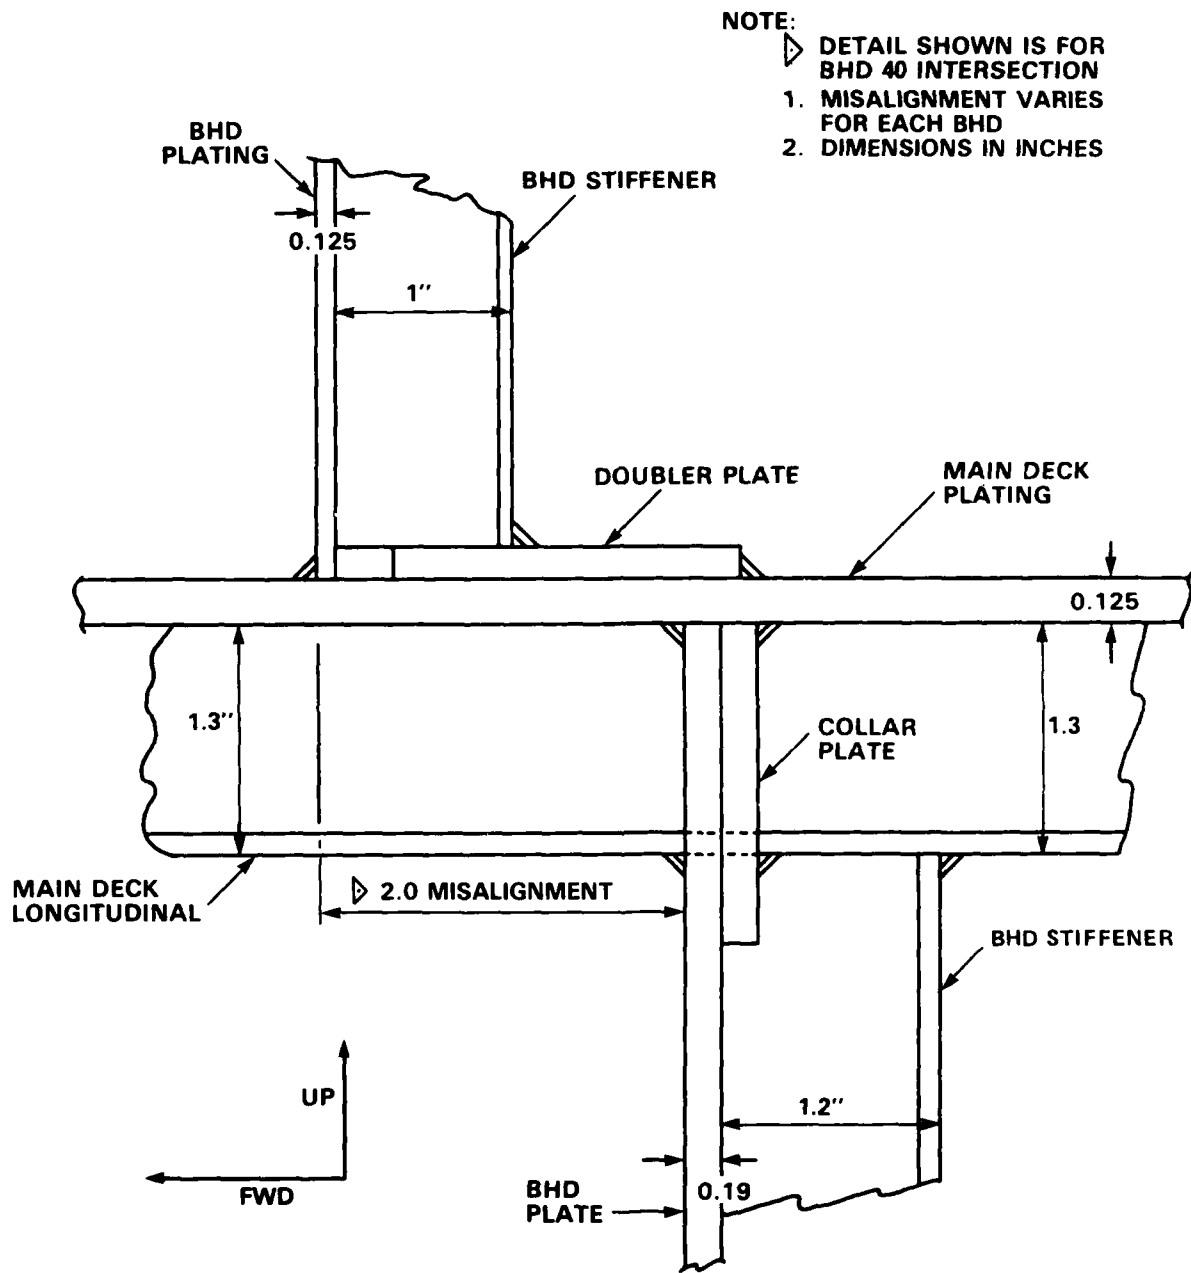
Bulkhead Misalignment at Intersection of Main Deck and Bulkheads Interior to Deckhouse
